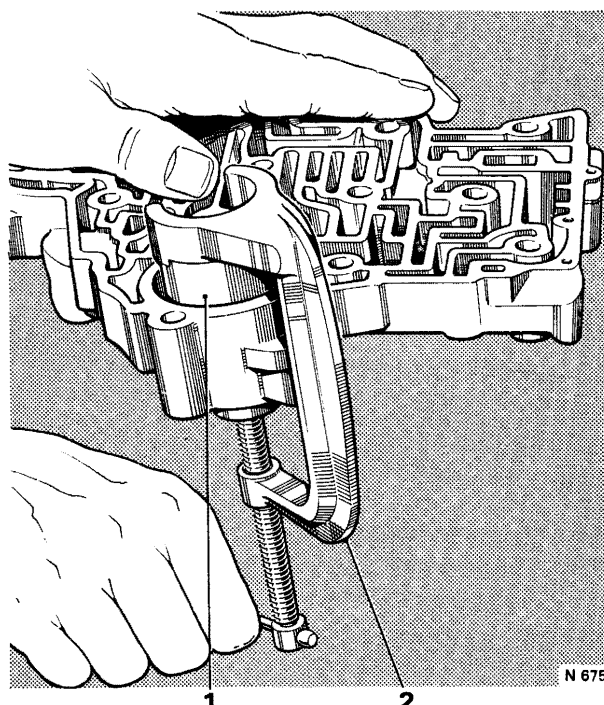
FITTING THE ACCUMULATOR AND SPRING
